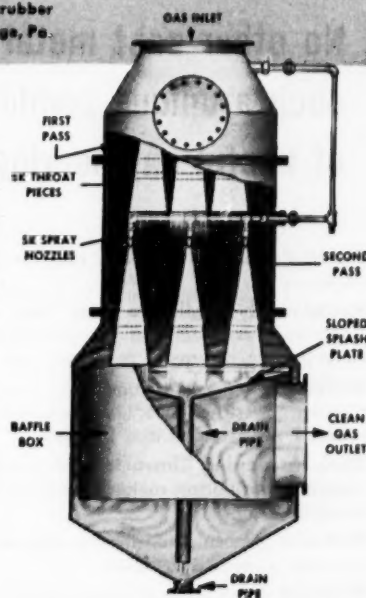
SK "Packaged" Gas Scrubber Unit
